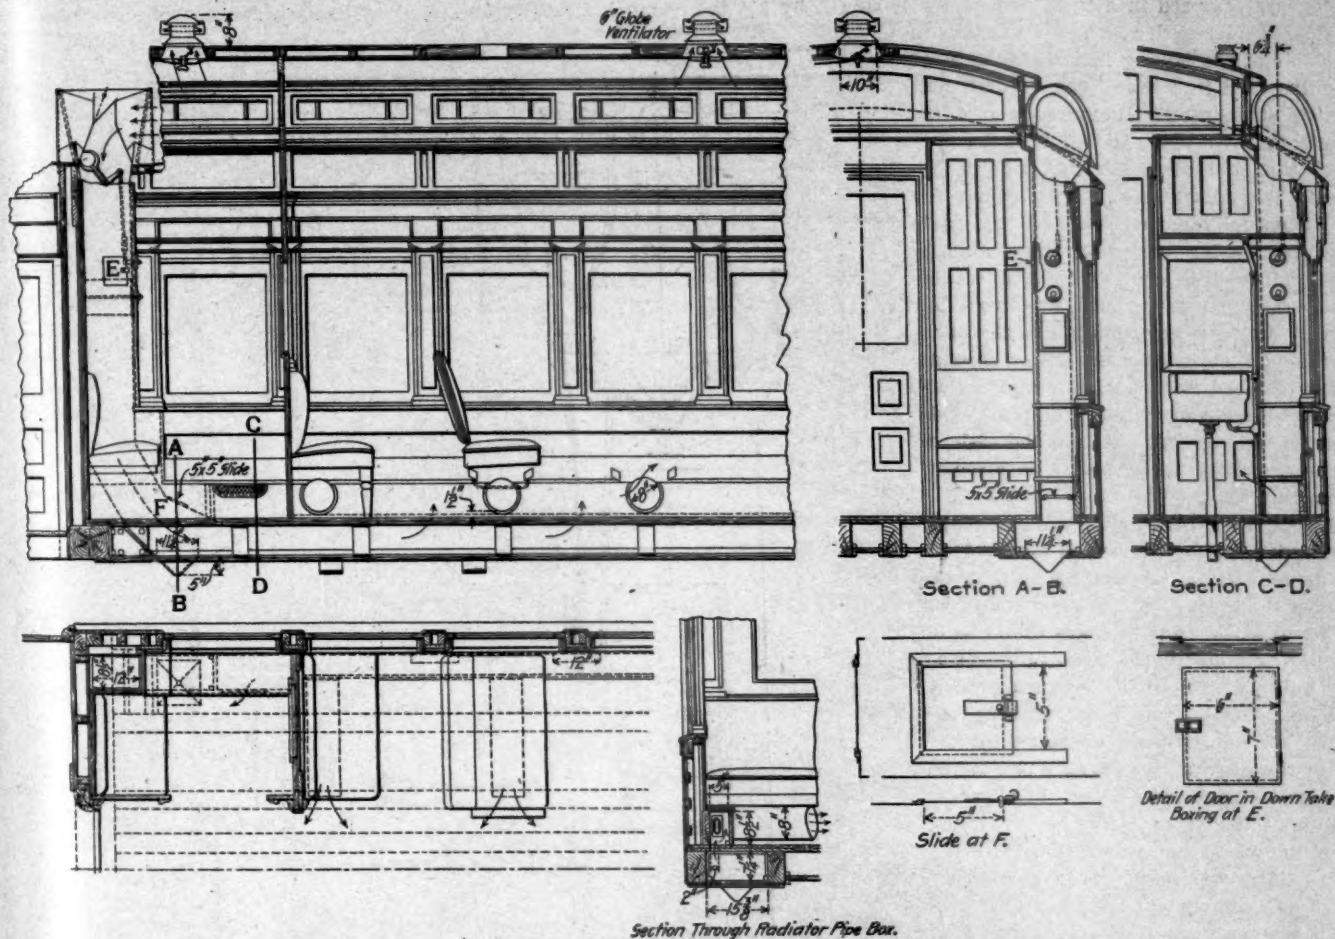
General Plan of Ventilating System for Passenger Cars—Pennsylvania Railroad.
